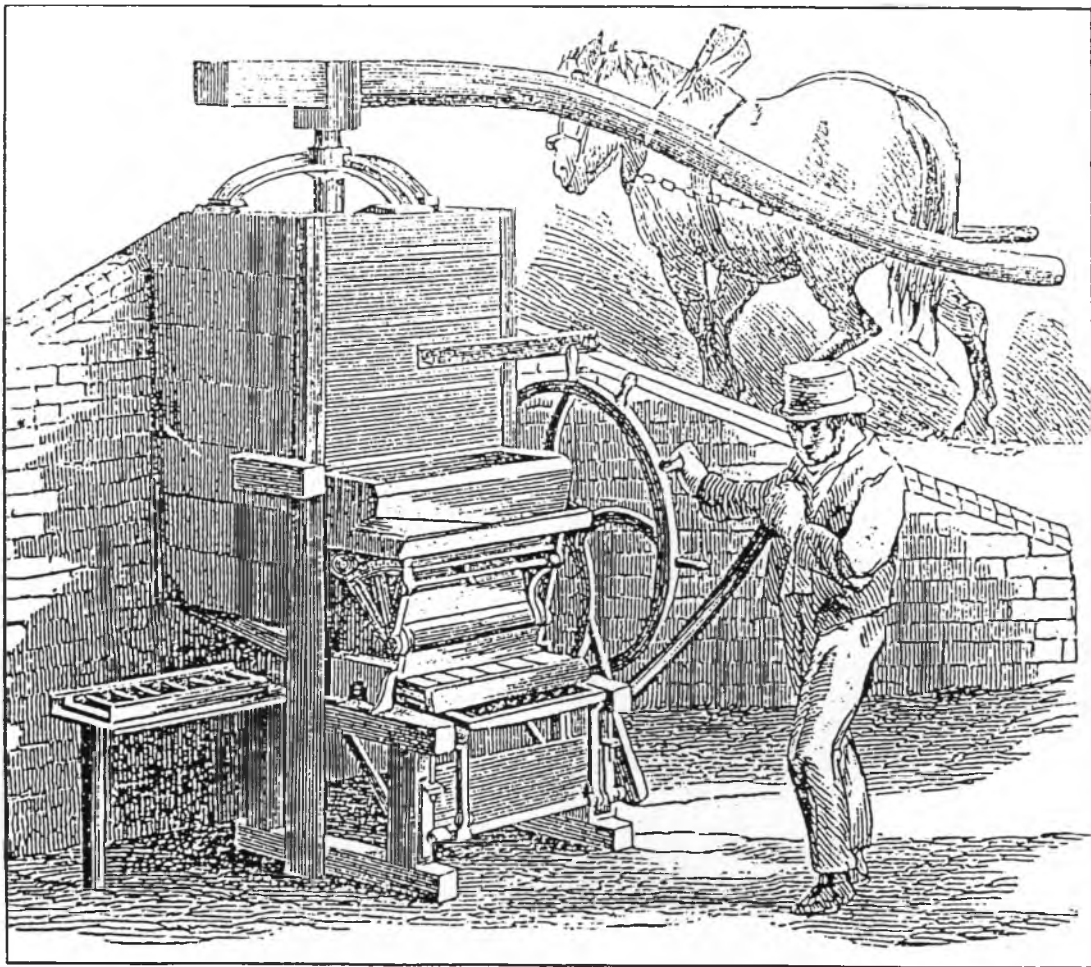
A Hall's patent horse-driven brick-moulding machine.
